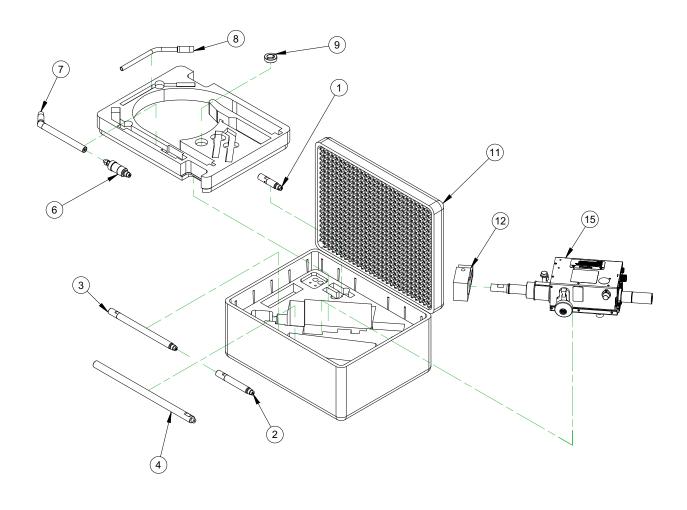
STEP POSITIONER ASSEMBLY PARTS LIST (P/N 105778)
